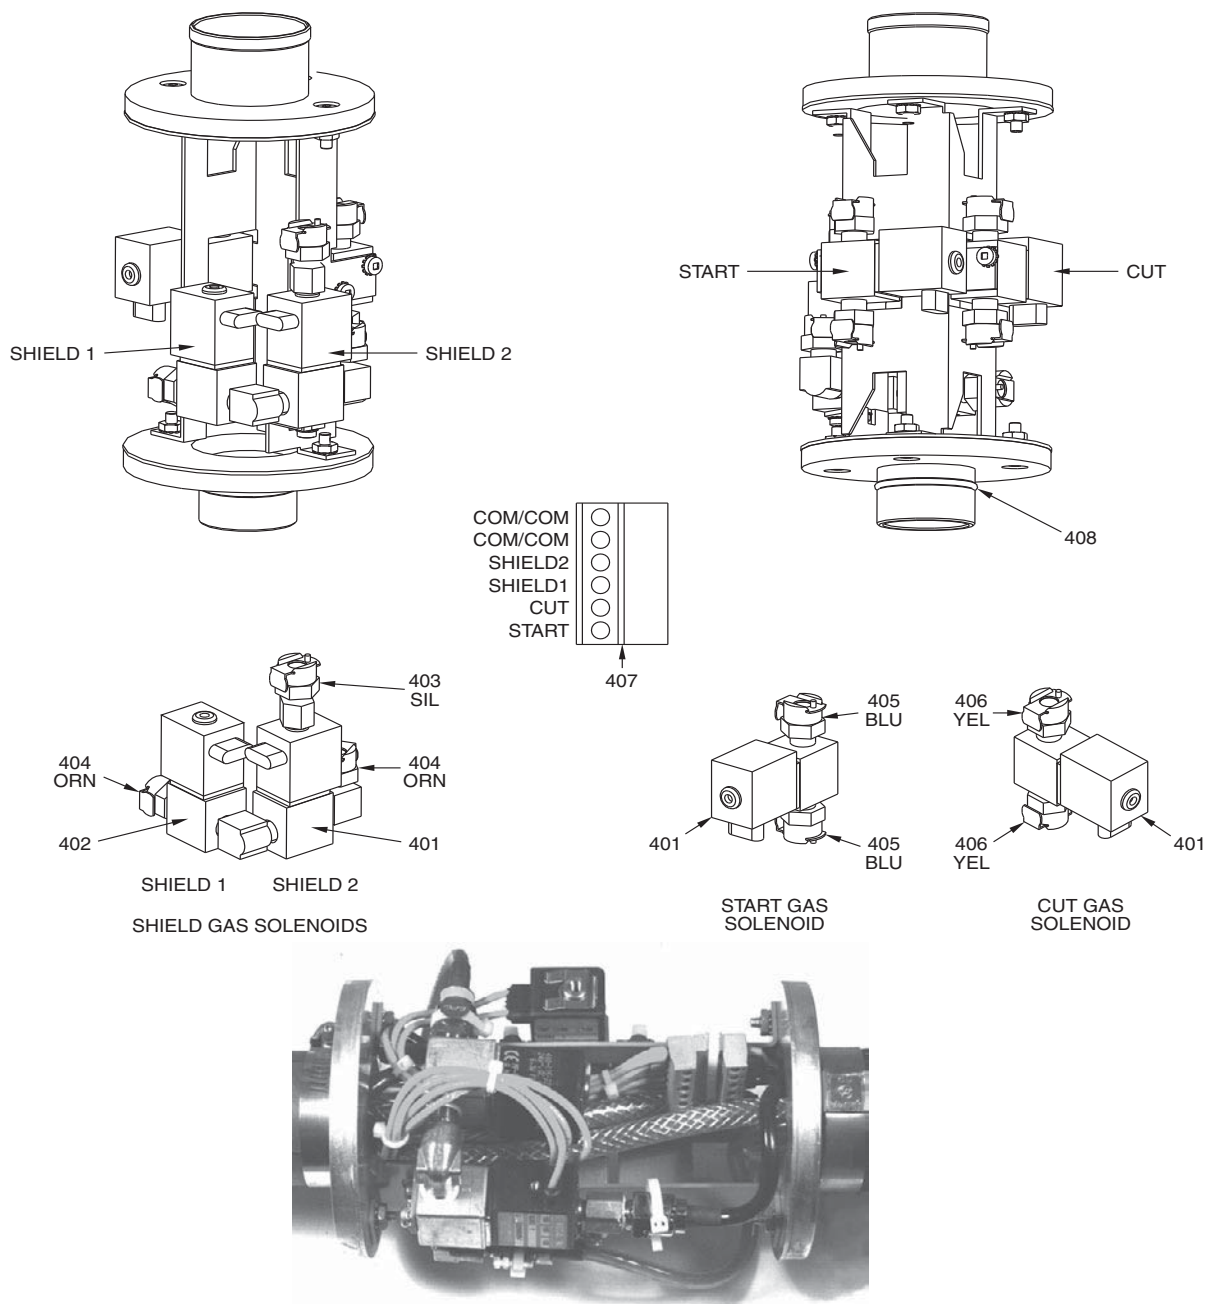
A. SOLENOID ASSEMBLY, PT-24, P/N 22376
